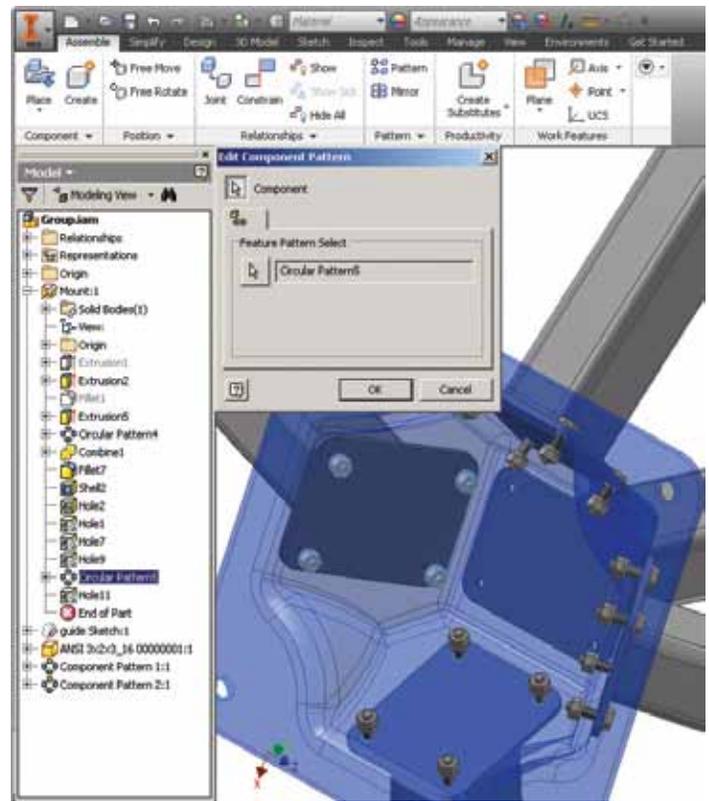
Using the Associative Pattern tool to extract the pattern information from the part. Here I have used the patterned mounting faces in the Part file to drive the patterned mounting fasteners in the Assembly.
